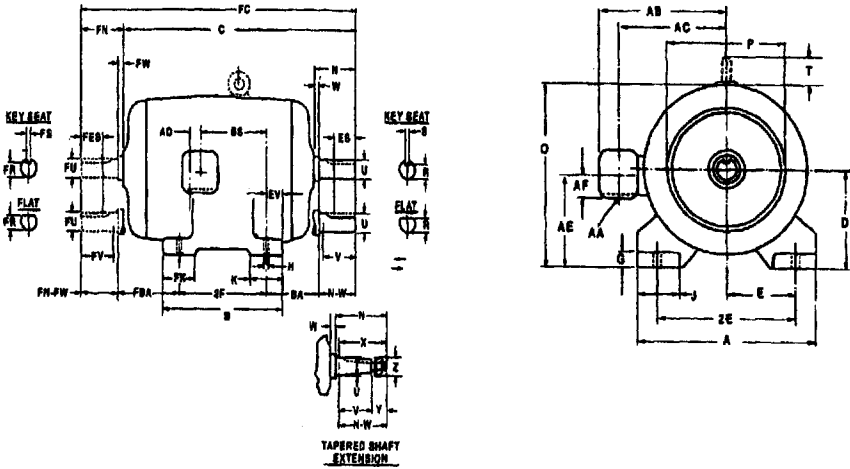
NEMA dimensions of medium motors for horizontal foot-mounted motors with a single shaft.
